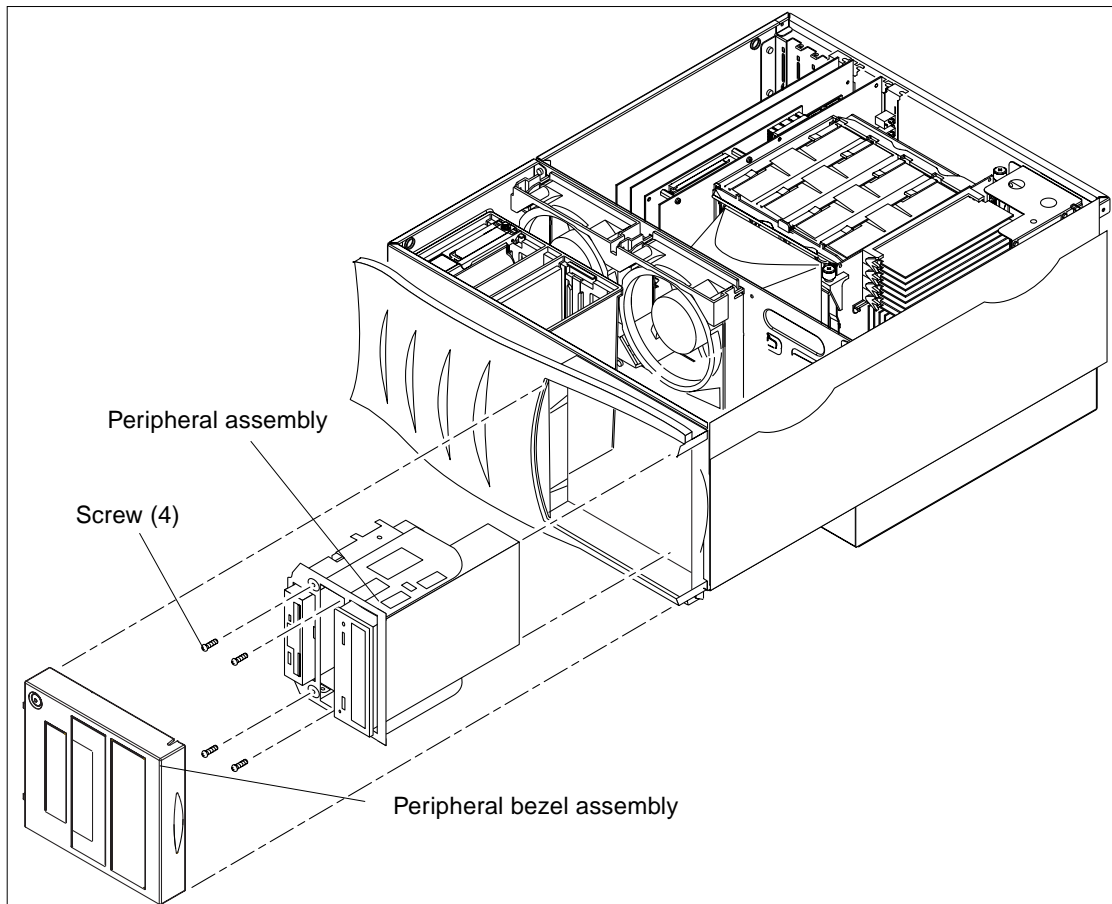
Removing and Replacing the Peripheral Assembly
